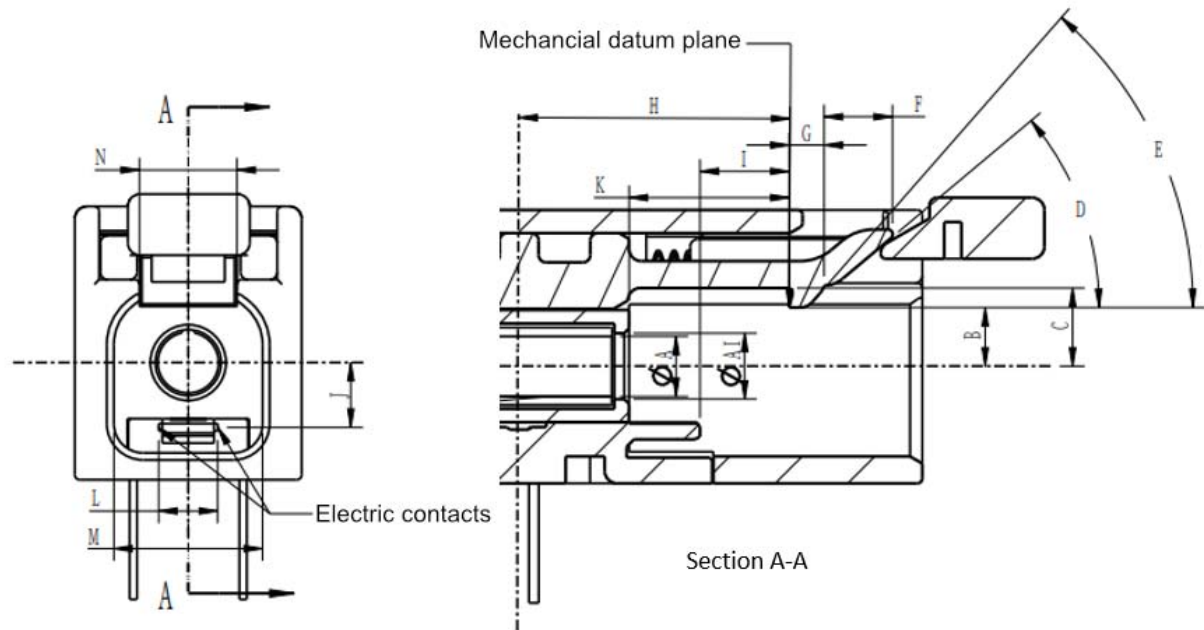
Interface for type XC hybrid connector adapters mounted on printed circuit boards
